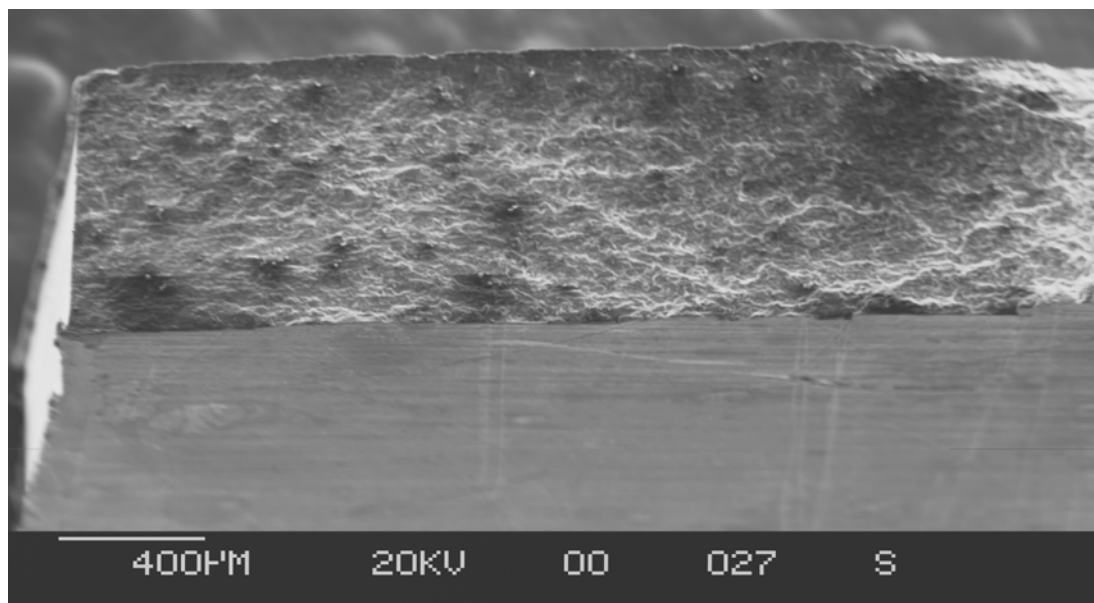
Fatigue Crack on Fracture Surface of Specimen 5893.
